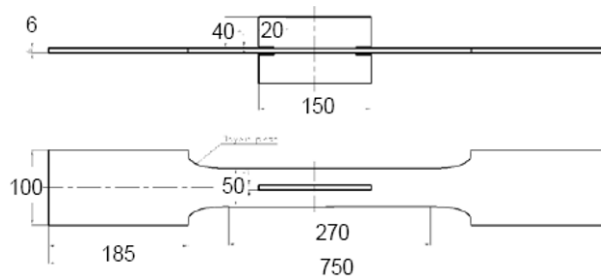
Specimen geometry for fatigue testing of 960 MPa yield strength steel welded elements [14]
